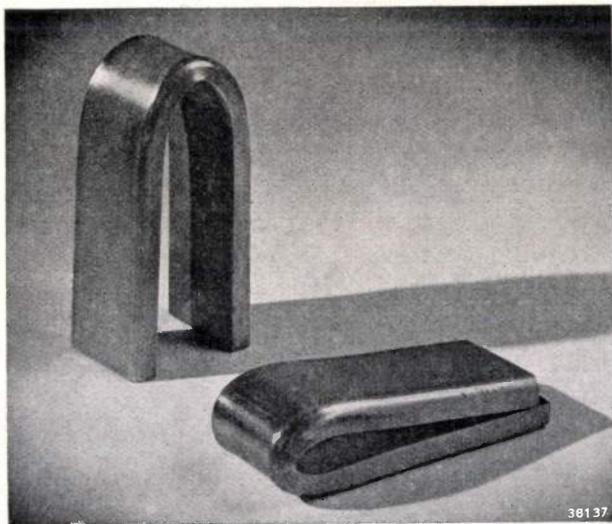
A commonly applied method of testing welded joints is the bending test. A test piece with the weld at its middle is bent over a mandrel of a given diameter until cracks occur. The test pieces here shown are 10 mm. thick and made of St 52 welded in a V-weld with the Philips rod 55 and bent over a mandrel of 30 mm diameter. With a bending angle of  $180^\circ$  the weld is still intact, even in the test piece in the foreground which was flattened after being bent.
